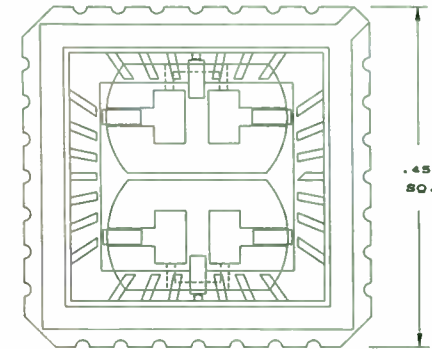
A 4-Pole, Dual Wafer LCC Assembly.
